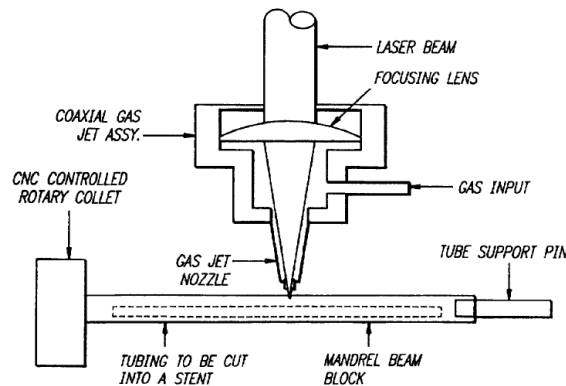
Laser cutting of a tube to produce a stent [11]
